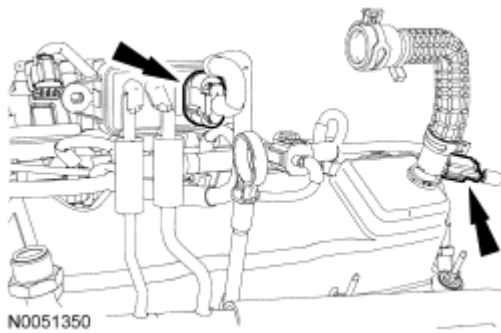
Locating Positive Crankcase Ventilation (PCV) Valve
